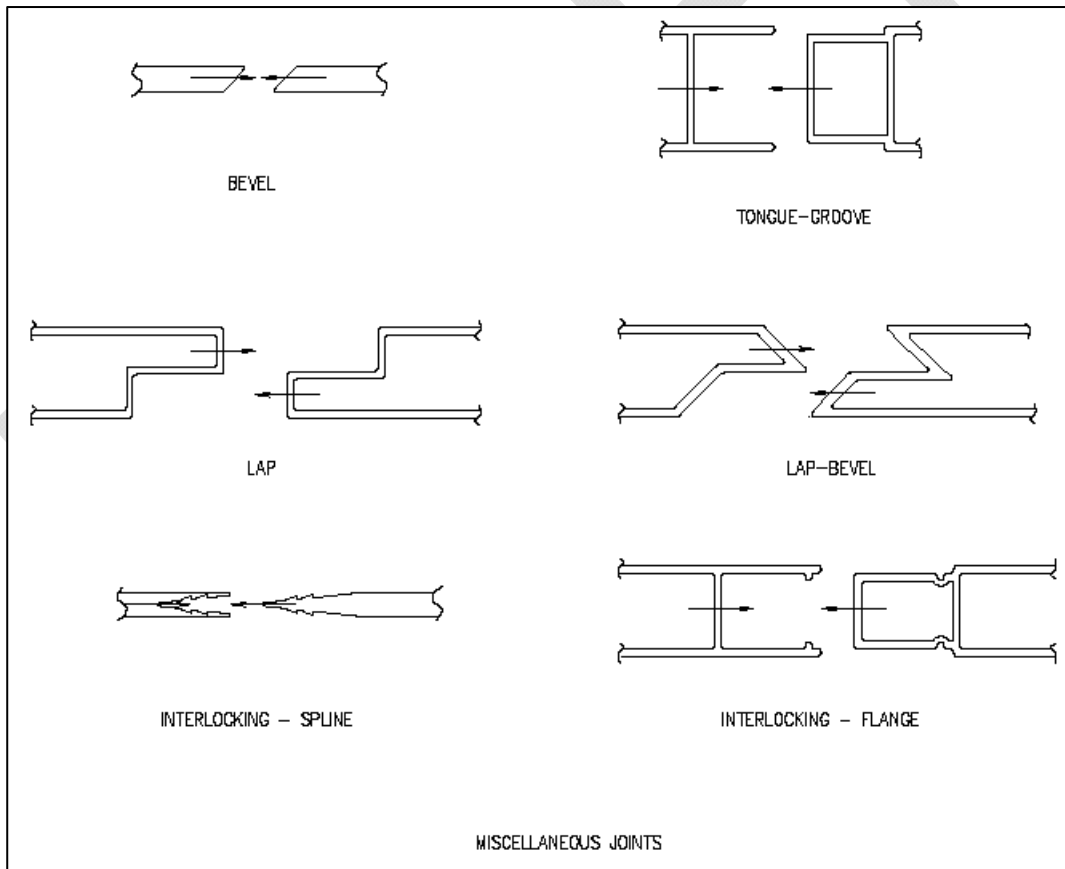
OTHER JOINT AND CONNECTION METHODS
